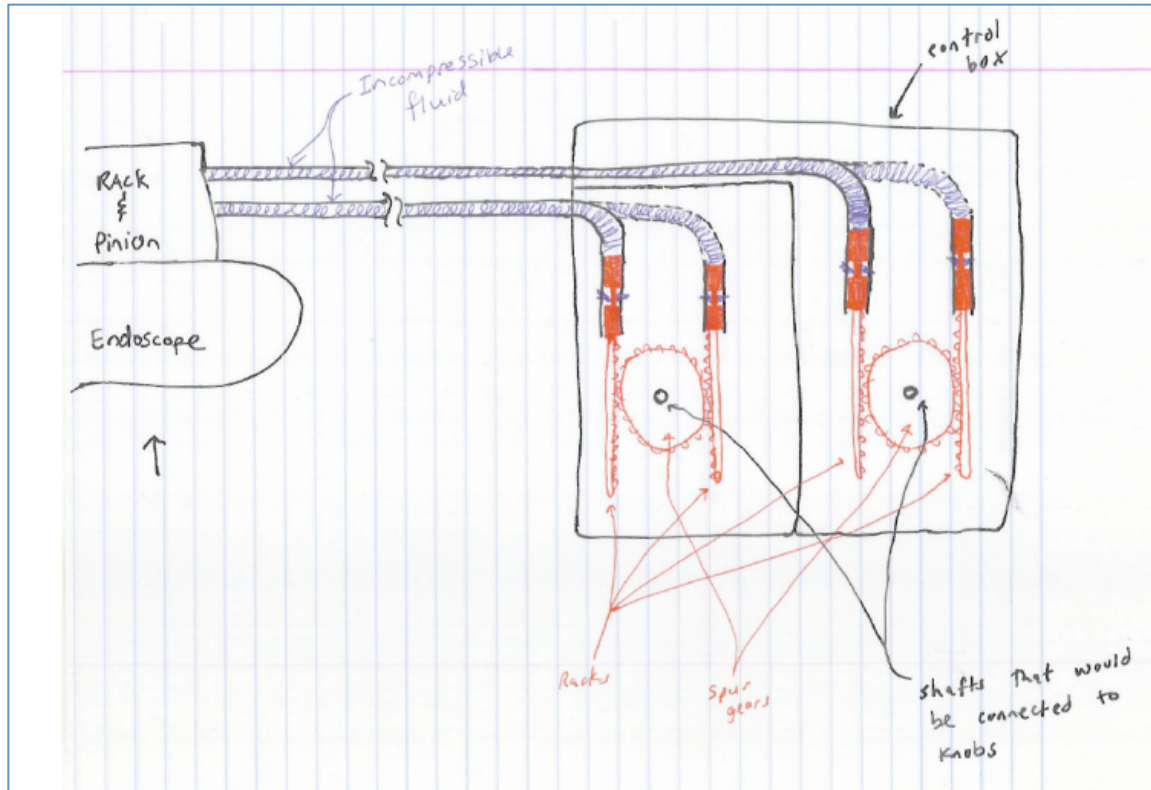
Double rack and pinion hydraulic system. The system would have a knob controlled rack and pinion system at the user interface. That rack and pinion gear set would manipulate the movement of a controlled hydraulic system that would cause the movement of racks of a rack and pinion gear set at the TEE interface. The rack and pinion at the TEE interface would control the movement of the TEE probe.
